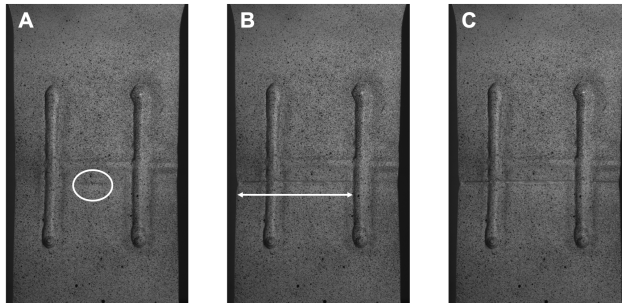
Fracture of specimen with cross weld speed 22 mm/s, without PWHT.
